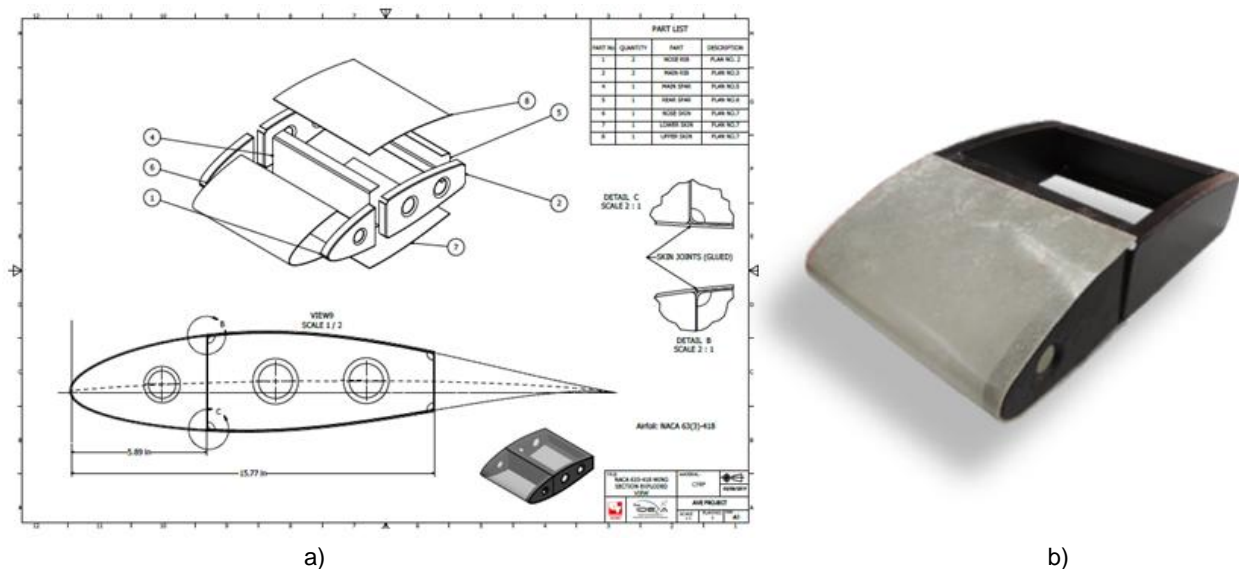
Project AVE - phase I results. a) Exploded view of an assembled wing section with a NACA airfoil 63₃418. b) A manufactured wing section with a modified CLARK YH airfoil.
